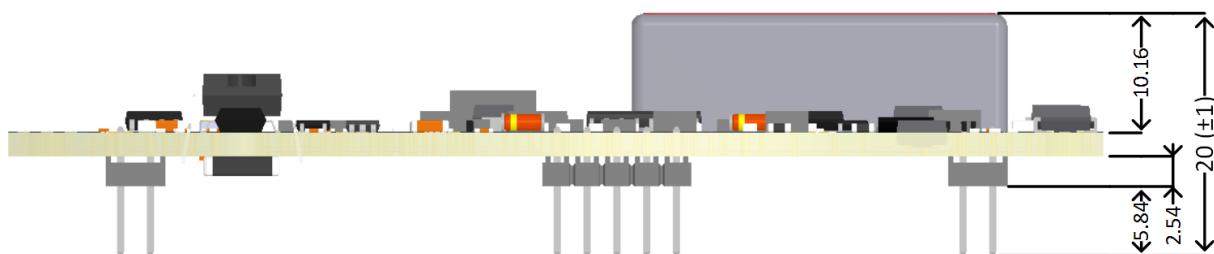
Mechanical view (side view) of FSB-PR. Board-to-board connector version. All dimensions are in mm.
